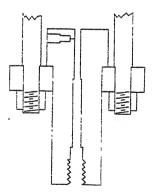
Section of the high pressure cylinder mounted in the lower end of the press.
